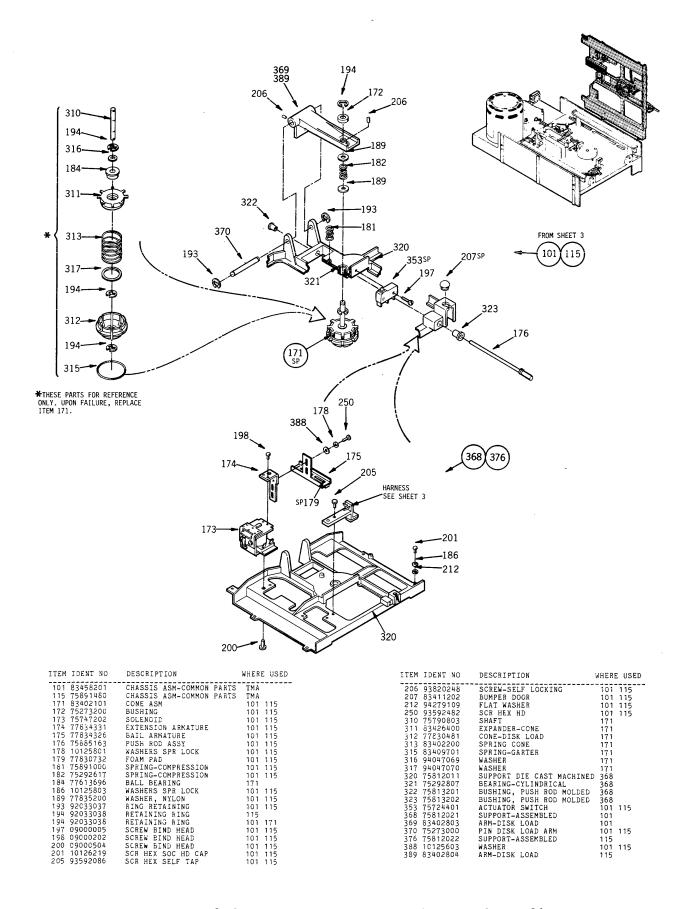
FDD COMMON PARTS (SHEET 2 OF 2)
